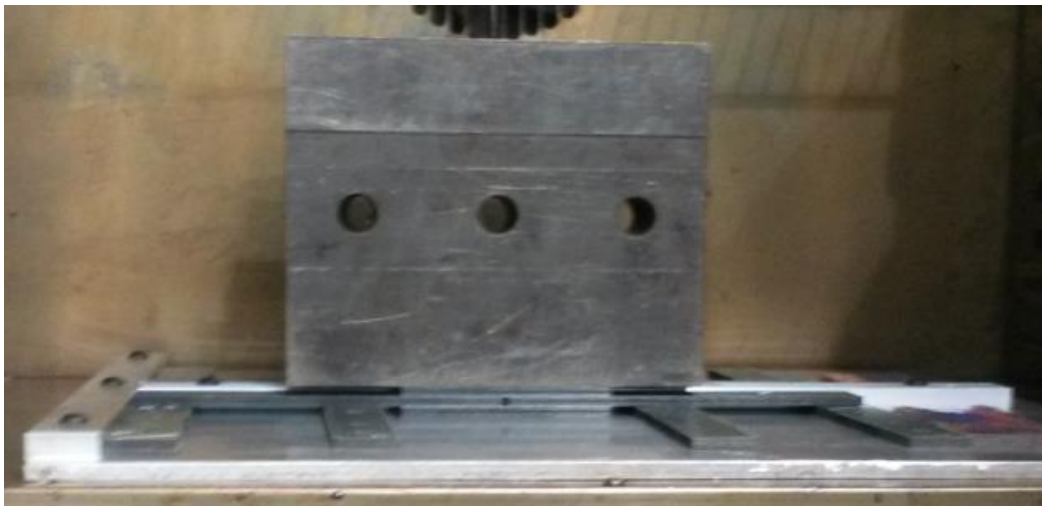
Adhesive joint, located on manufacturing jig and loaded with steel weight within the curing oven.
